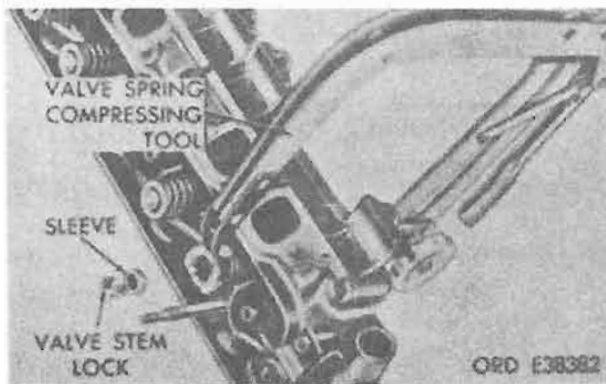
Intake valve spring retainer lock—removal and installation.
